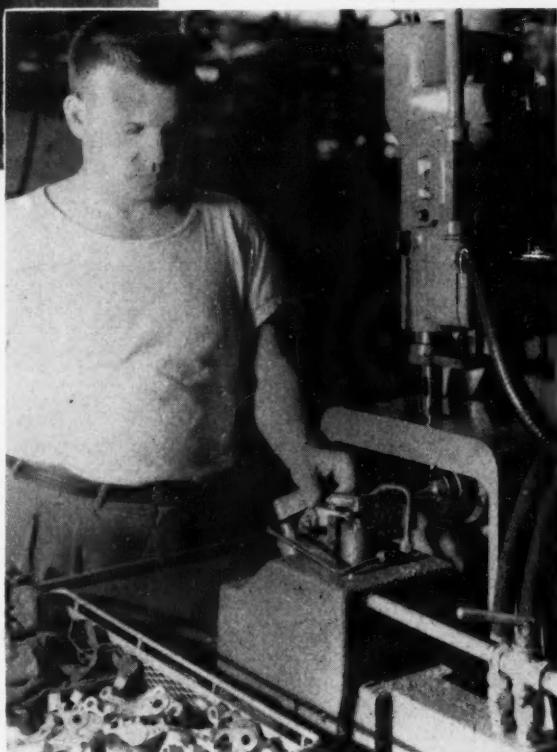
Servo levers are drilled and tapped in this combination machine made of a Heald Bore-Matic drilling unit and a Hartford Special tapper.
